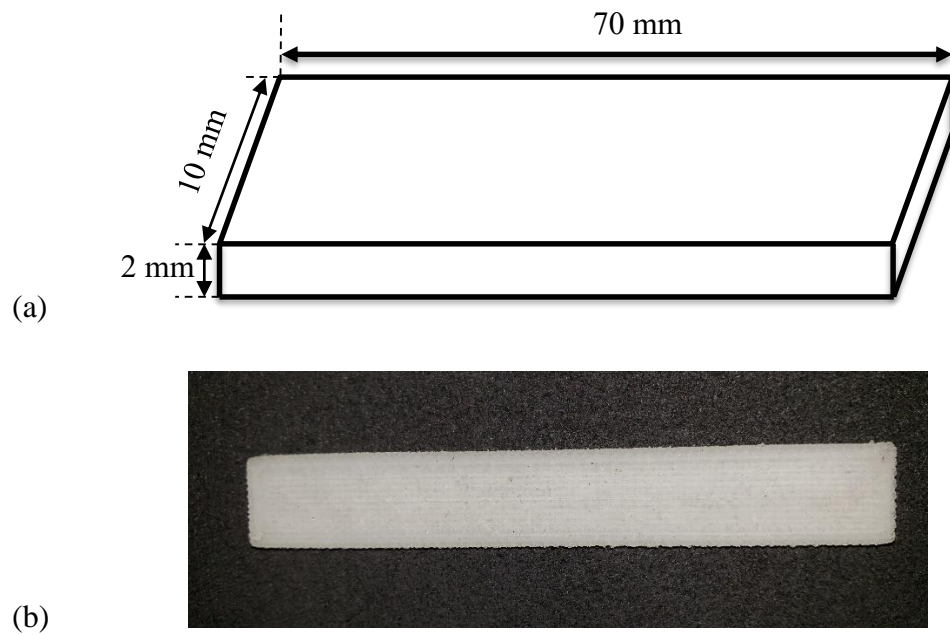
Test specimen dimensions (a) and an actual sample in the testing rig (b)
